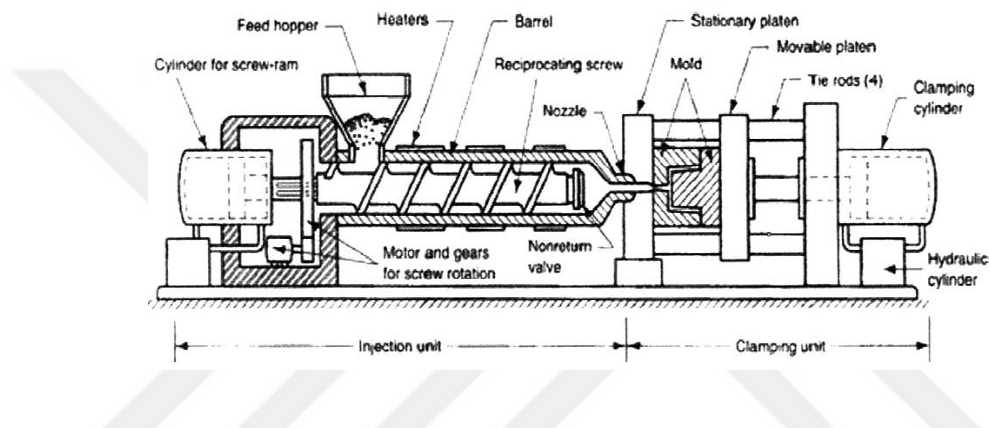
Schematic view of screw-type injection molding (IM) machine [39]
